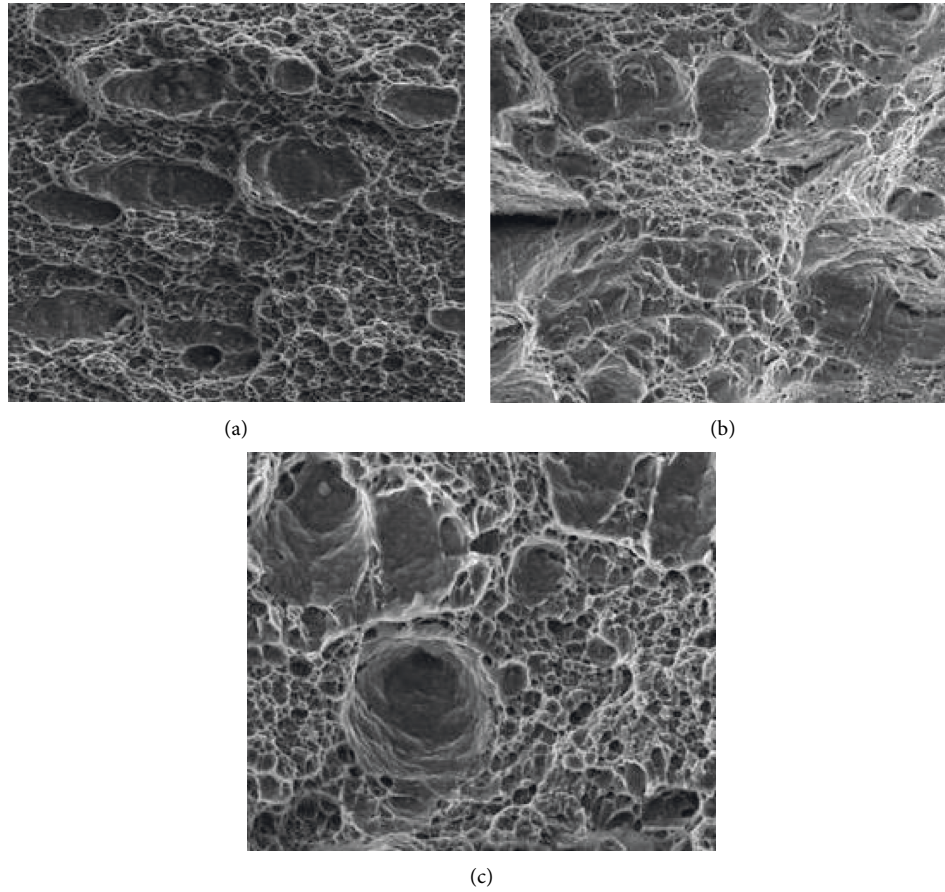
SEM image of the fractured surface at different joints. (a) HT-0 weld joint. (b) HT-350 weld joint. (c) HT-500 weld joint.
